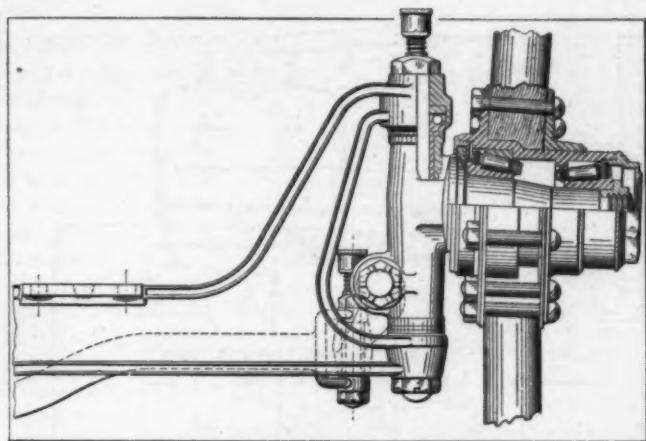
I-section front axle, looking at the front, cut away to illustrate Timken roller bearings in front wheel hub and ball bearing knuckles
